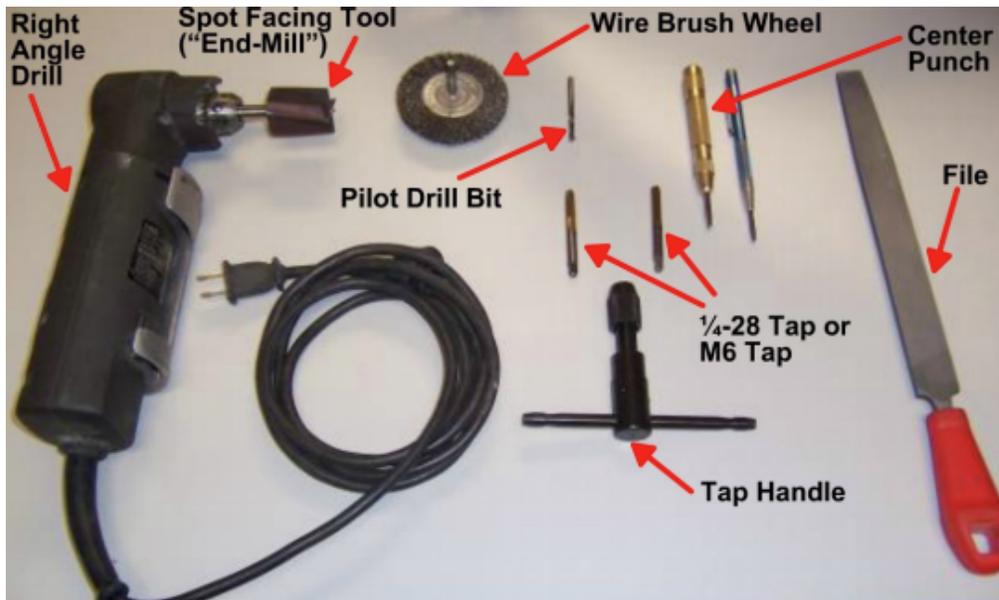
Common Tools for accelerometer mounting (image used courtesy of Connection Technology Center, Inc.)
